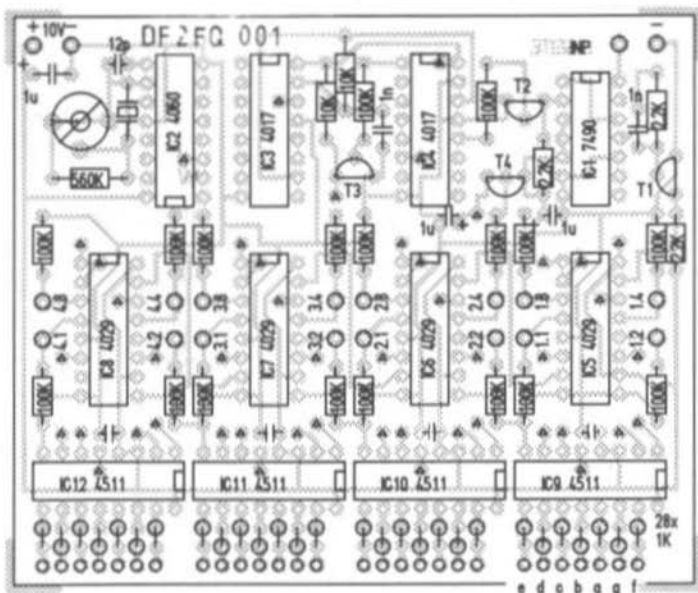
Component locations on the double-coated PC-board for the frequency counter (without read-outs). Dimensions: 90 mm x 75 mm
